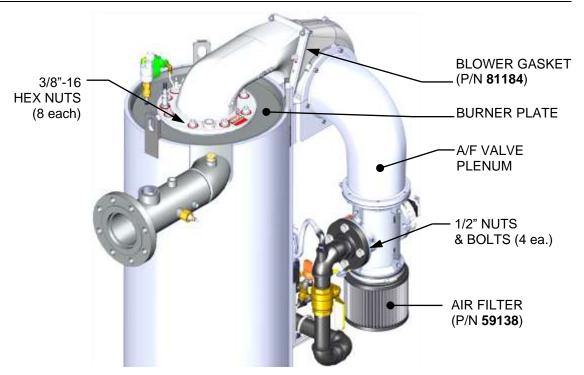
BMK1500/2000 Burner Assembly Mounting Details
